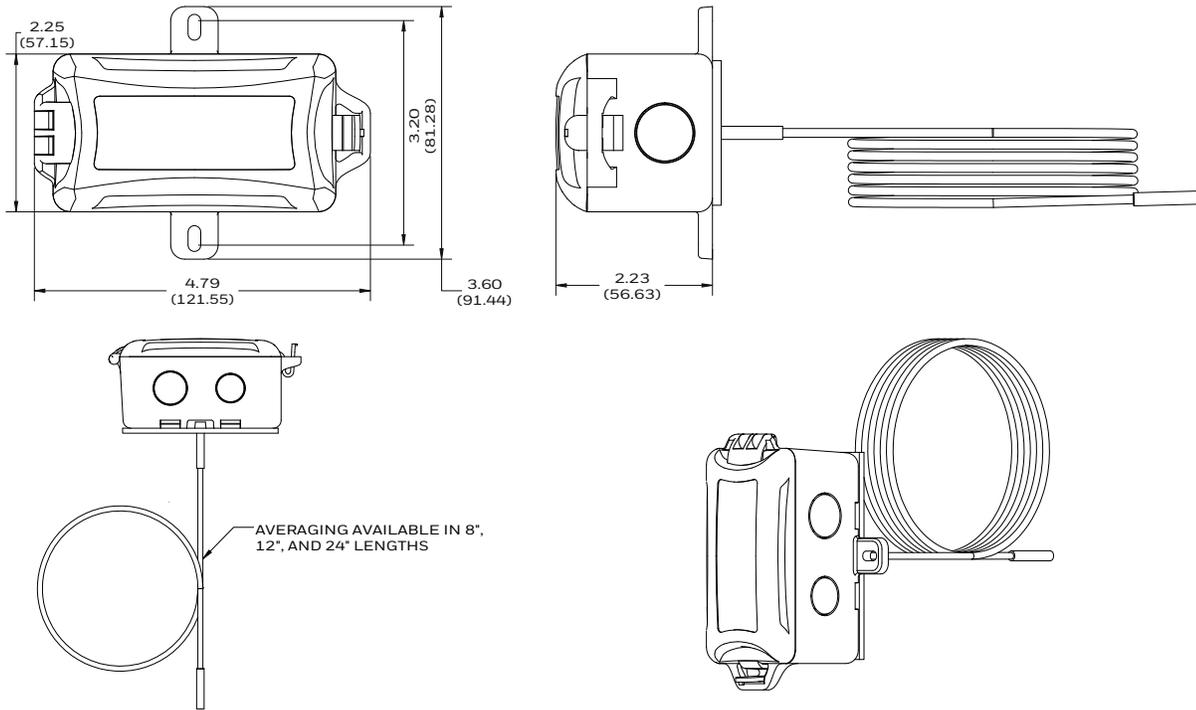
C7021J, C7023J, C7031J, C7041J dimensions in in. (mm).
